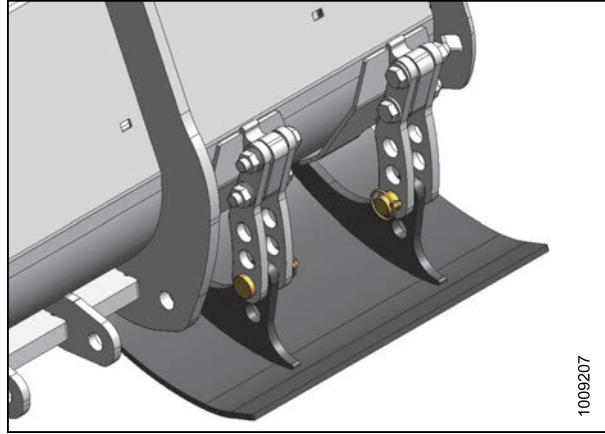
Skid Shoe (Right Side Shown — Left Side Similar)
